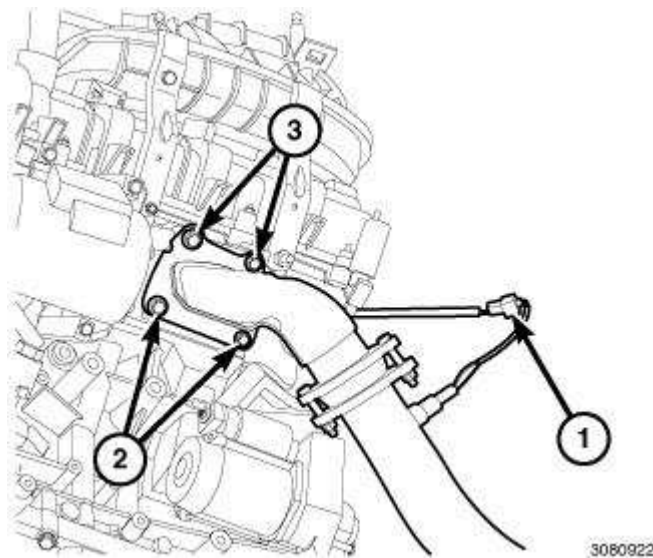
Left Upstream Oxygen Sensor Electrical Connector & Down Pipe Flange Bolts
